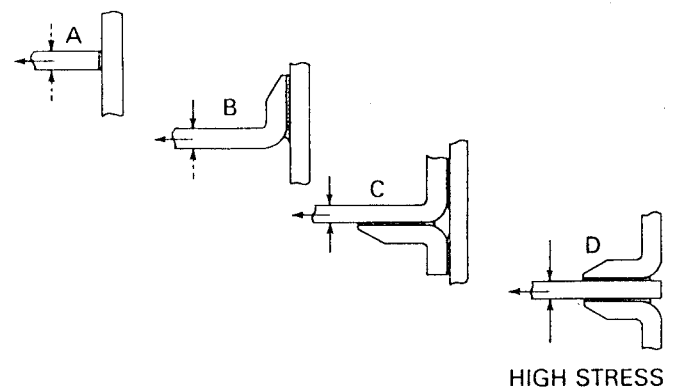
T-joint Designs for Sheet Metal Brazements
